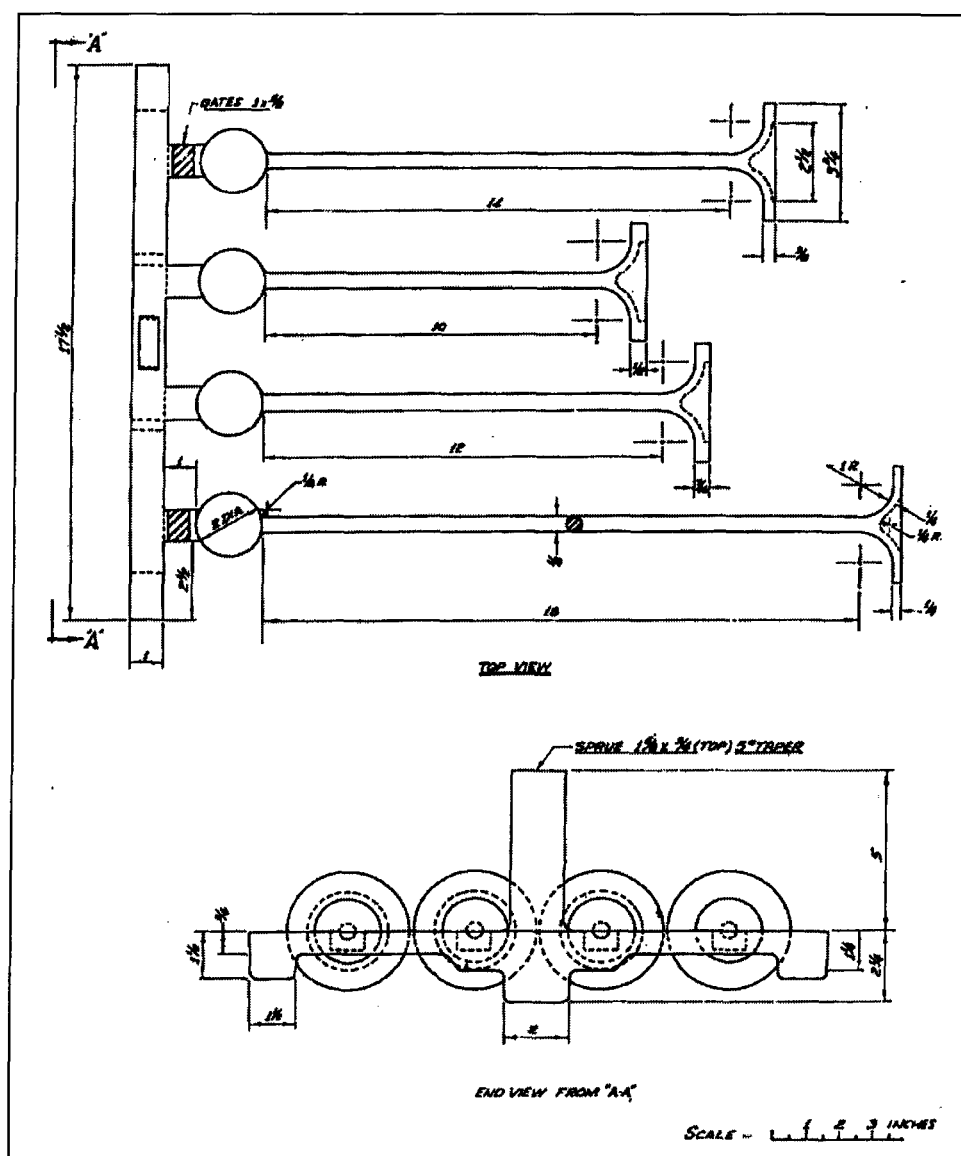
Ball-bar hot-tearing test pattern [55].
